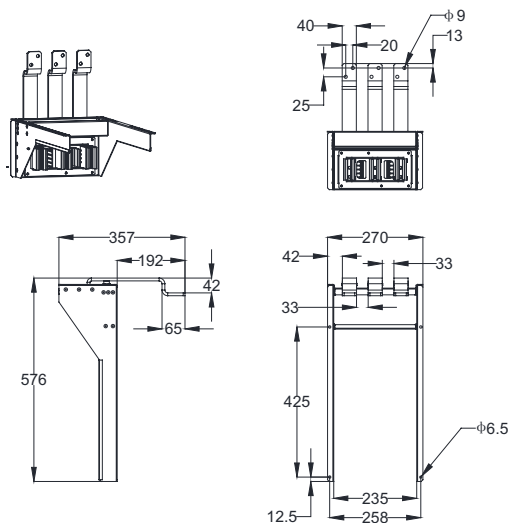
Upper dimensions of T2 quick mounting kit (unit: mm)
